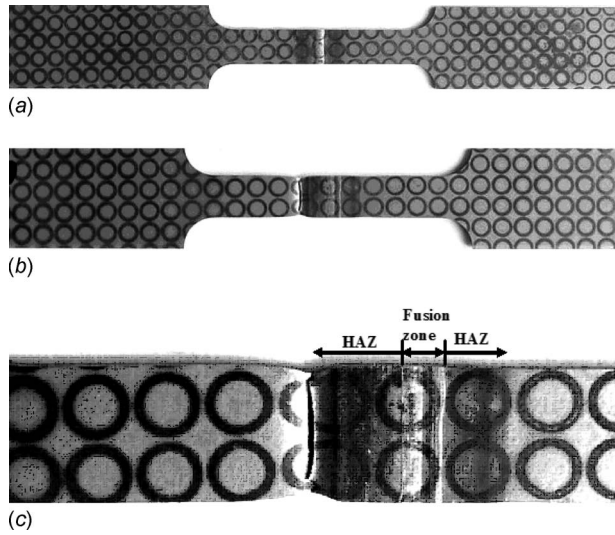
Tensile test specimen of the diode weld at 1.45 m/min: (a) before test, (b) after test, and (c) close up view of the necking and fracture region
